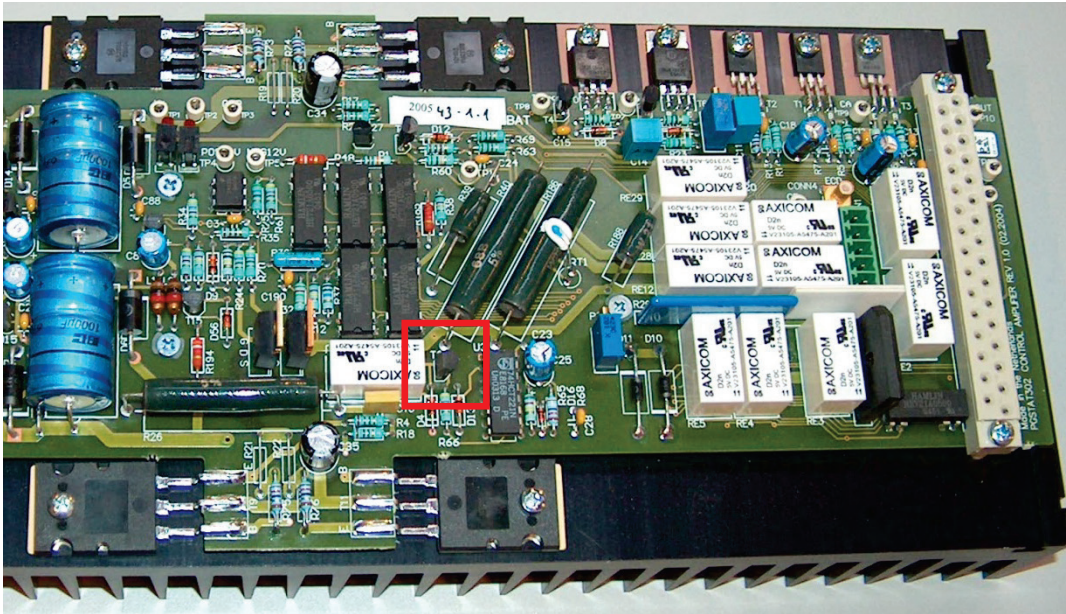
T21 is located at the bottom of the Control Amplifier PCB
